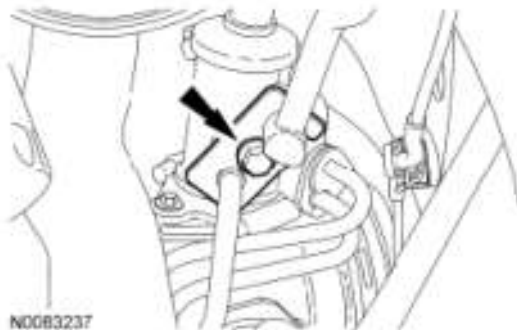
Locating Power Steering Pressure Hose Support Bracket Nut
